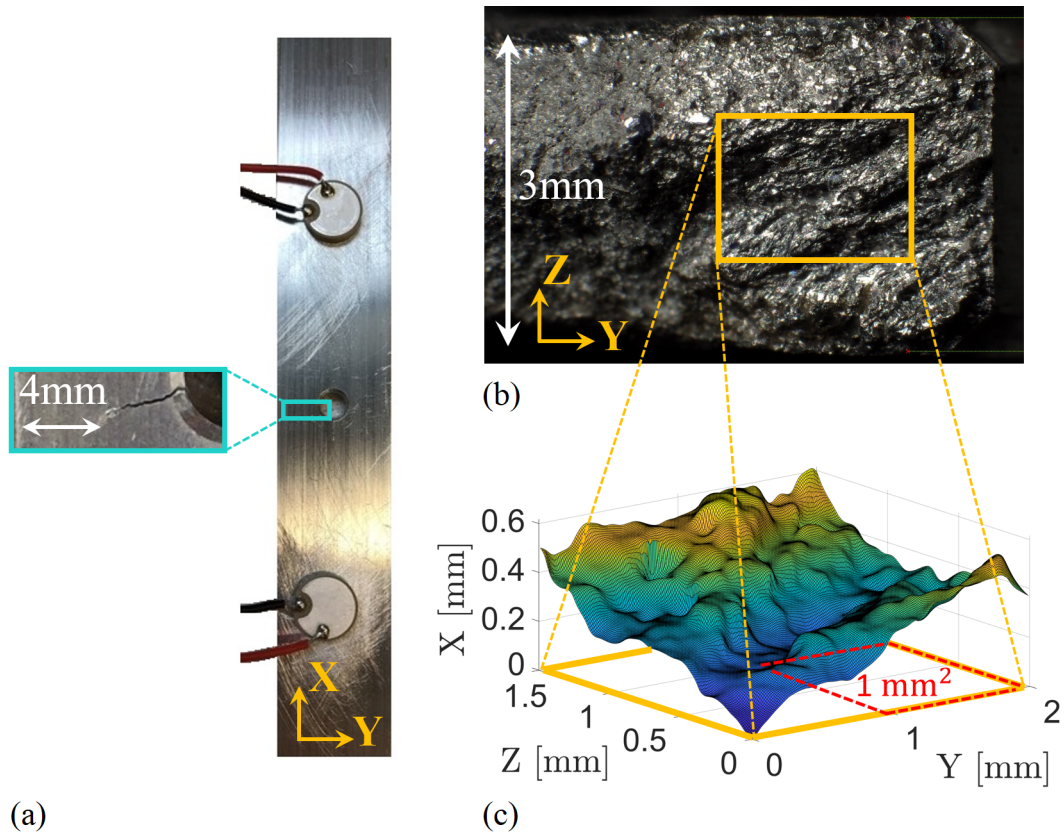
(a) Aluminum specimen with a fatigue crack initiating from the notch (b) Microscope image of the crack surface magnified with factor 1500 (c) Point cloud describing the measured three-dimensional geometry of the crack surface
